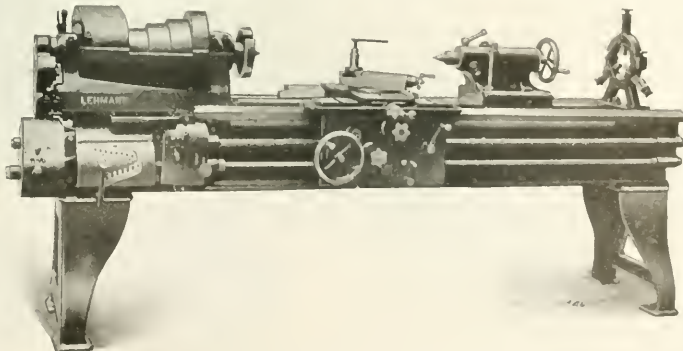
Lehmann 16-inch Double Back-geared Engine Lathe
